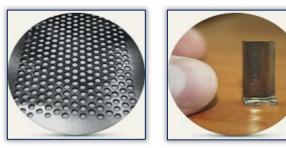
Examples of machined parts with ECM made from titanum alloys [9]
